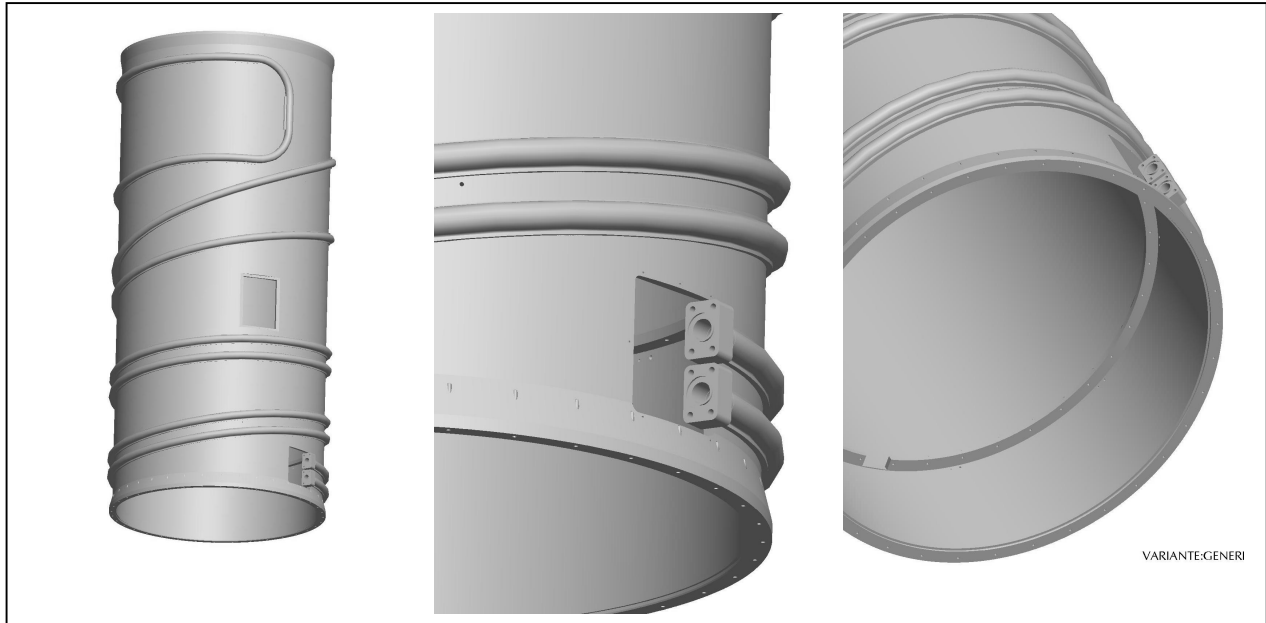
left: complete heat exchanger; middle: tube endings with connection flange for Helium in and out; right: connection flange for the fringe and flexure tracker unit and the inside flange for the cold optics
